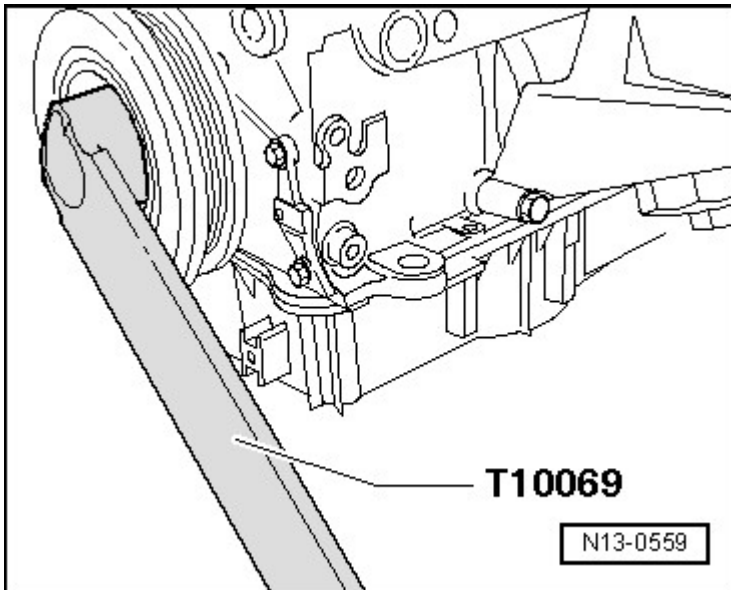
Counter-Holder T10069 To Hold Vibration Damper
